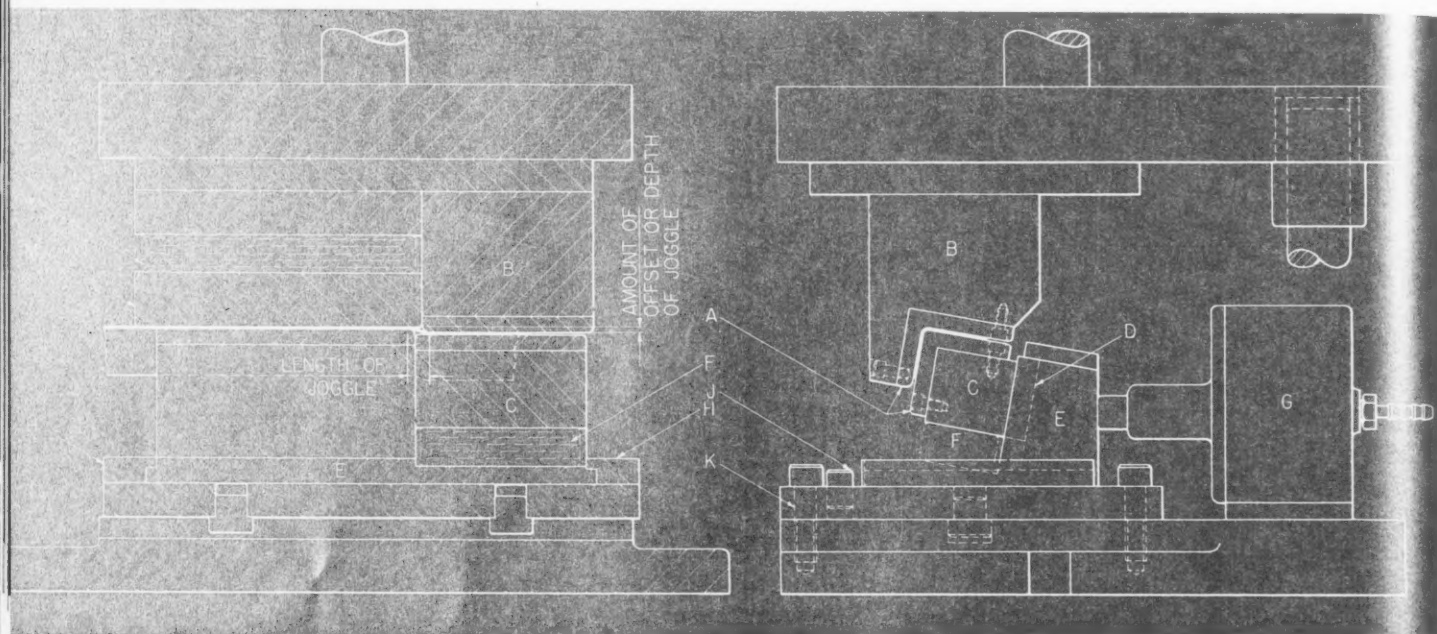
Universal joggling die employing interchangeable inserts A, rubber pressure pads F and L, and air cylinder G. Depth of joggling can be varied without changing the inserts
